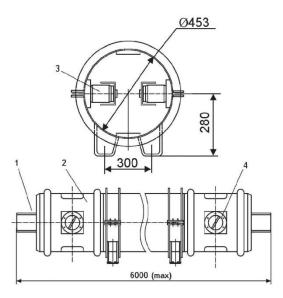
LVBAC-1.2 busduct. Rectilinear section. 1 – current-carrying busbar; 2 - casing; 3 - insulator; 4 – insulator cover.
